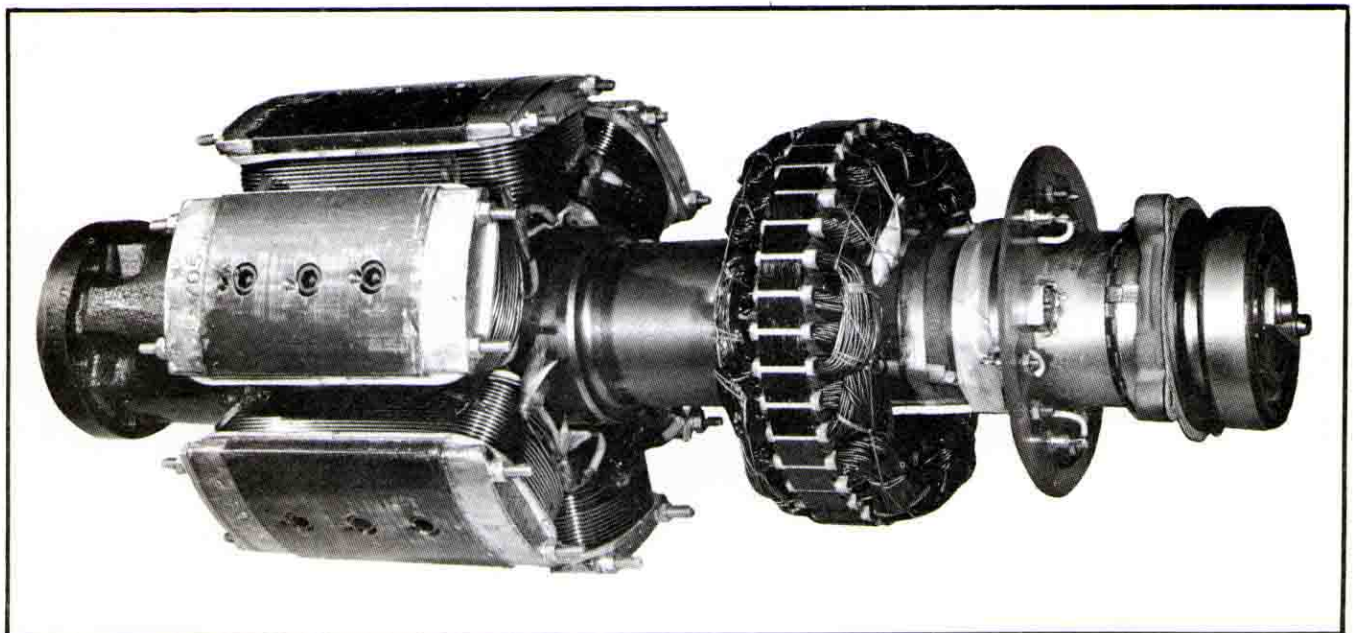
ROTATING FIELD ASSEMBLY, INCLUDING EXCITER ARMATURE, RECTIFIER PLATE ASSEMBLY AND BALL BEARING
